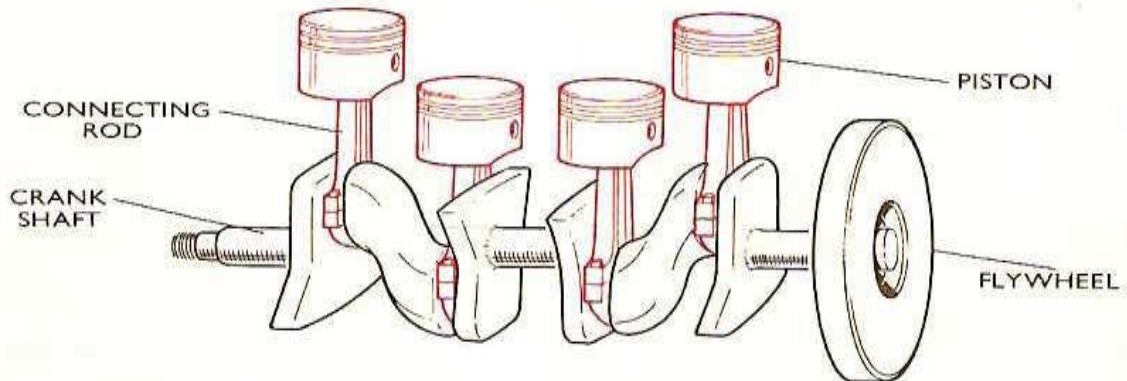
A four-cylinder engine crankshaft with connecting rods and pistons.
